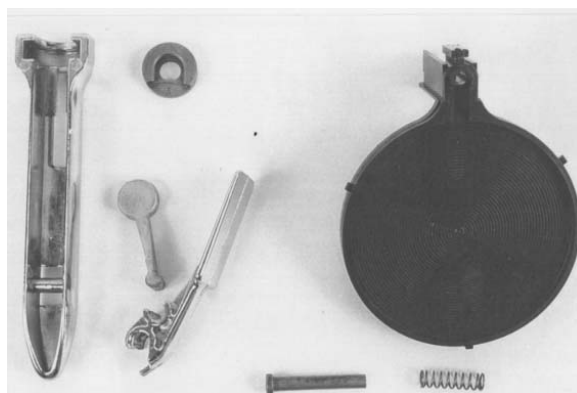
The disassembled priming tool without the cover which keeps the primers in place on the tray. The shellholder is on the upper left side, and the primer punch in the bottom middle of the figure. The thinnest part of it is in contact with the primers.
